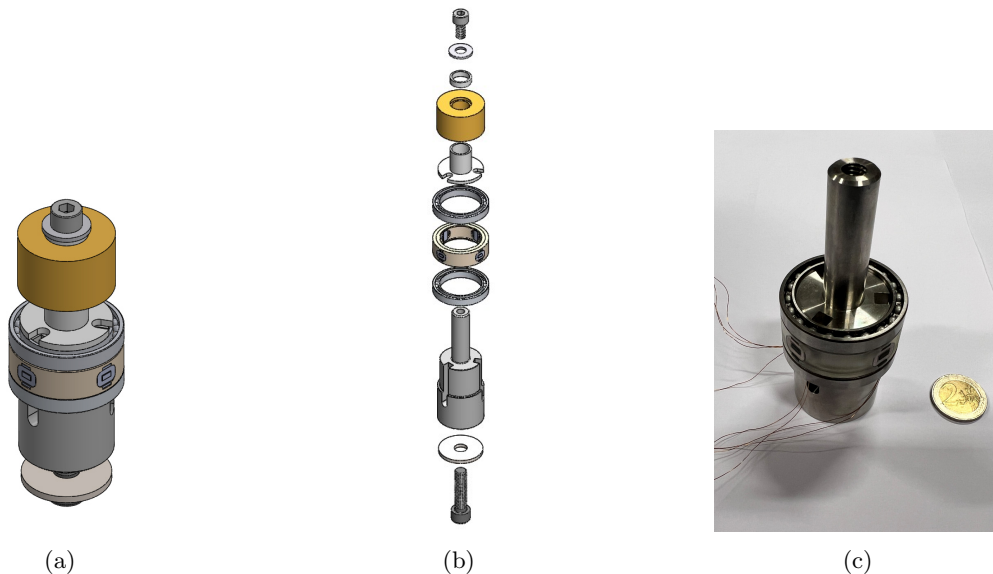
Shaft subassembly: (a) assembled, (b) splitted, (c) real view (partial assembly).
